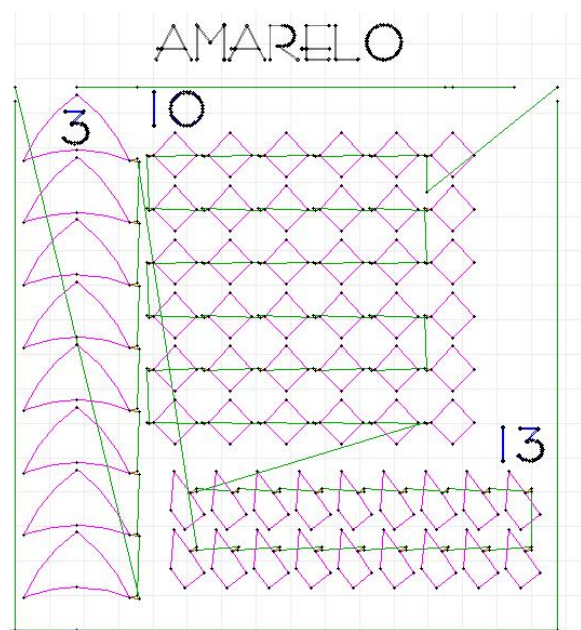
Yellow tiles with drawing of parts 3, 10 and 13.
